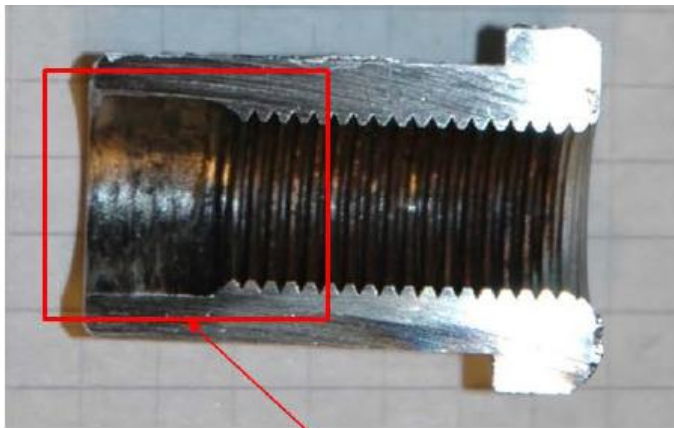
Traces of bolt threads in bushing. Photo: FLO materials lab
